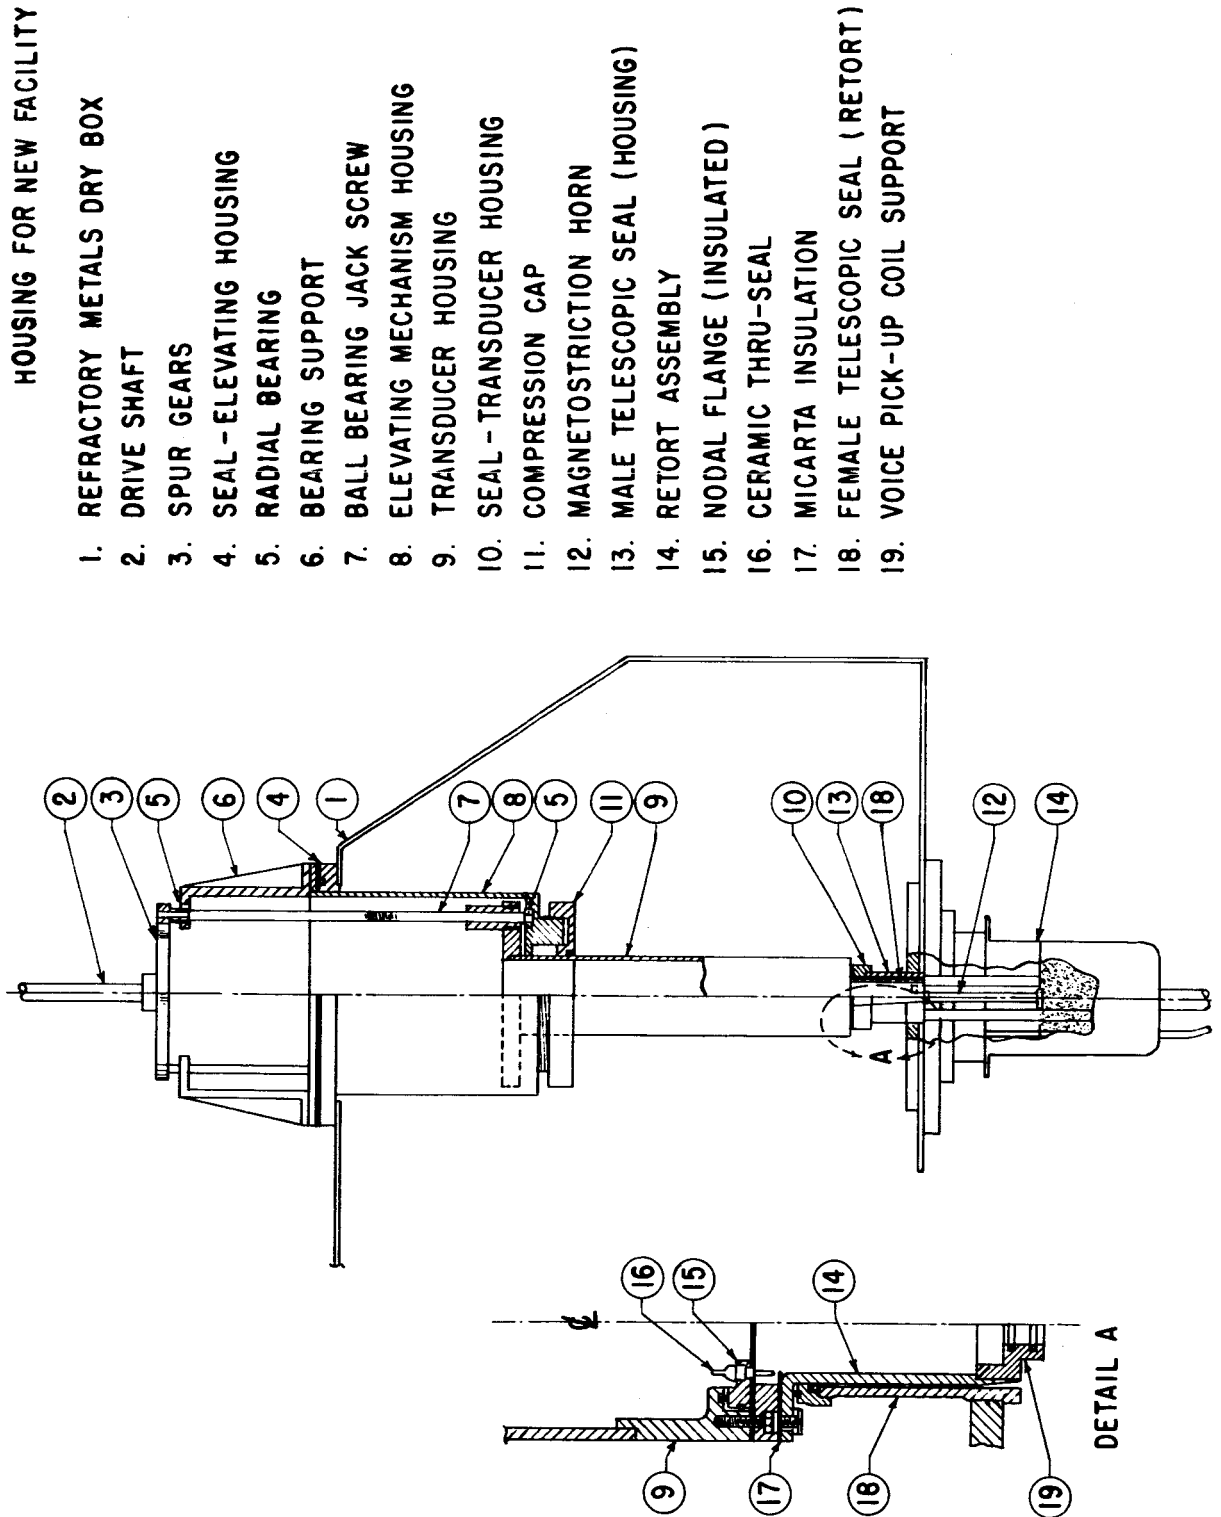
ELEVATING MECHANISM AND TUBULAR HOUSING FOR NEW FACILITY
